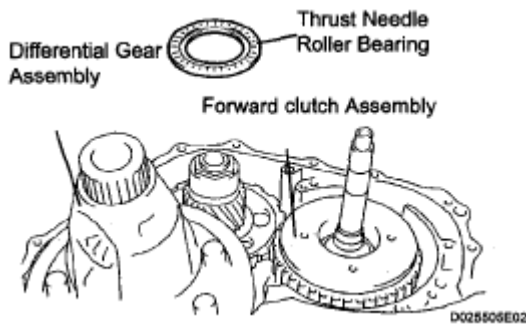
Identifying Thrust Needle Roller Bearing And Differential Gear Assembly
